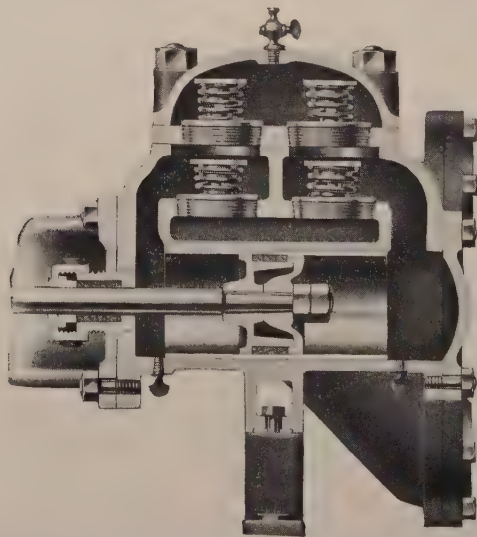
Worthington Valve-plate Type Liquid End—submerged piston pattern. Driven bronze cylinder liners,
